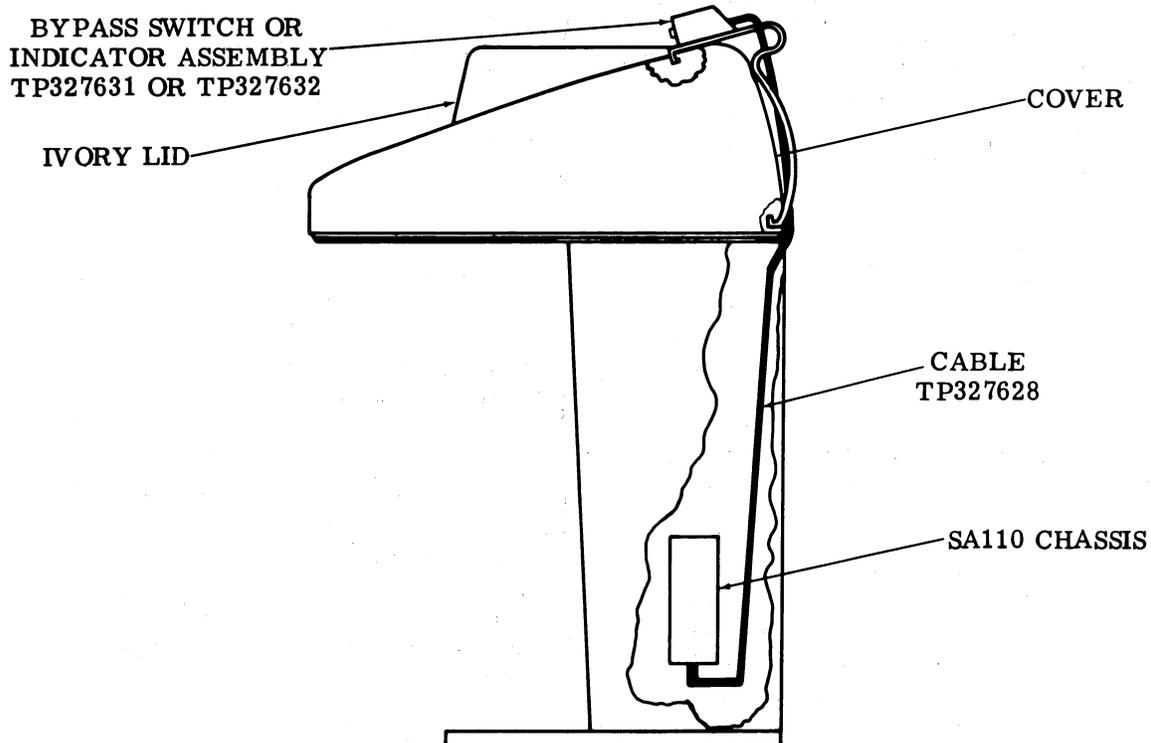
Location of SA110 Chassis and Bypass Switch or Indicator Assembly on 33 Type Set
